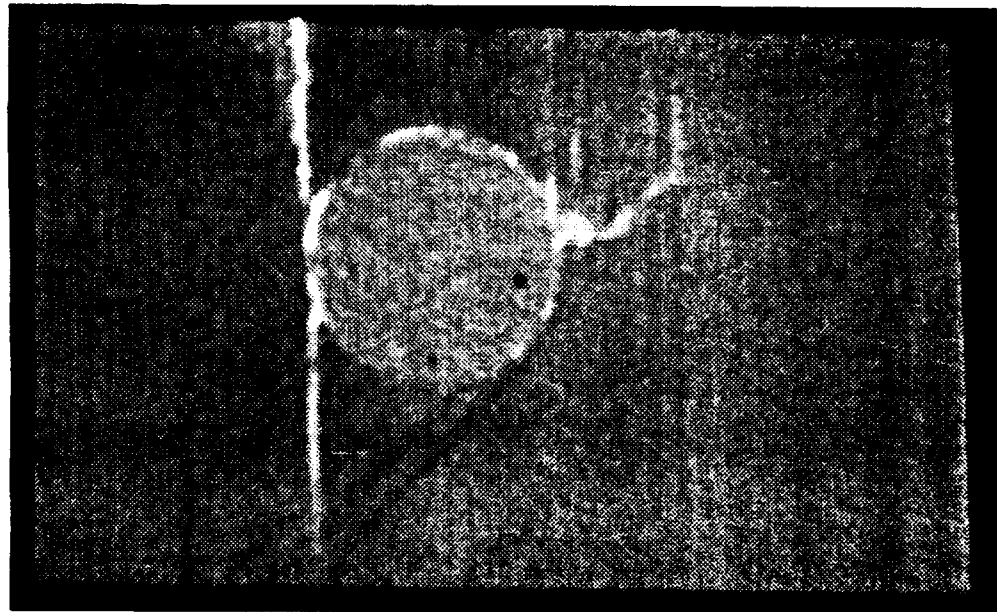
CT slice through a damaged graphite epoxy sample showing a transverse crack and a 0 degree crack intersecting a fastener hole.
